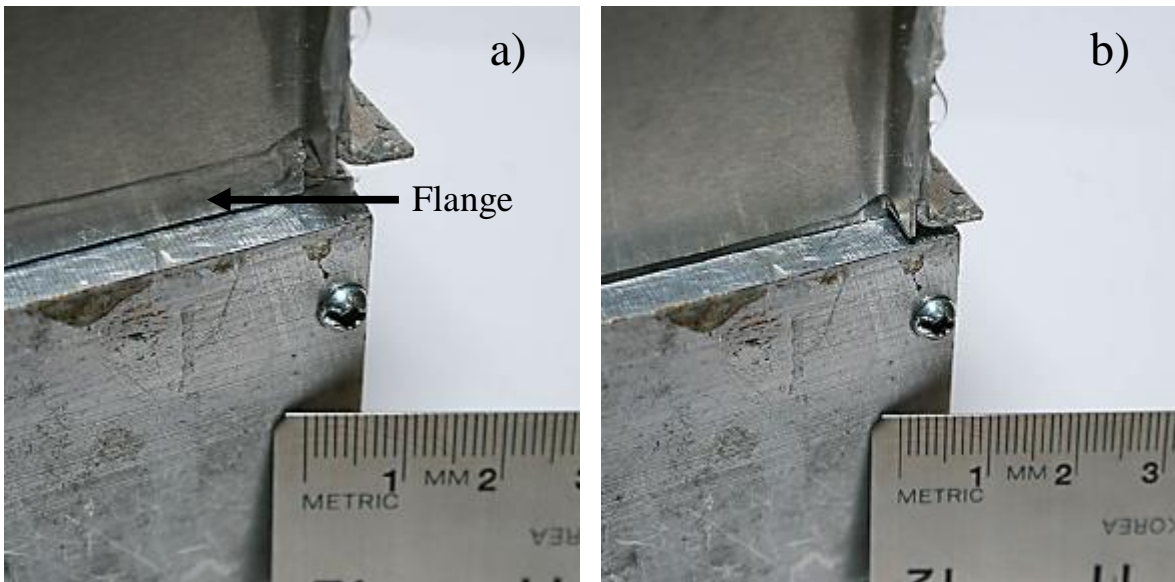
Picture of a) the flange sitting on top of the mold and b) the flange tucked inside the mold to hold the hopper in place.
